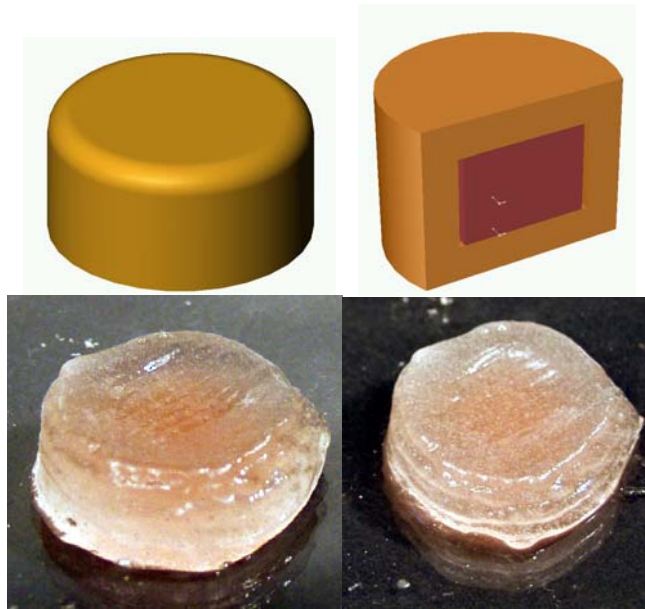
Test Piece 2: Two Gel Embedded Piece (Red Dyed Gel Embedded in Clear
